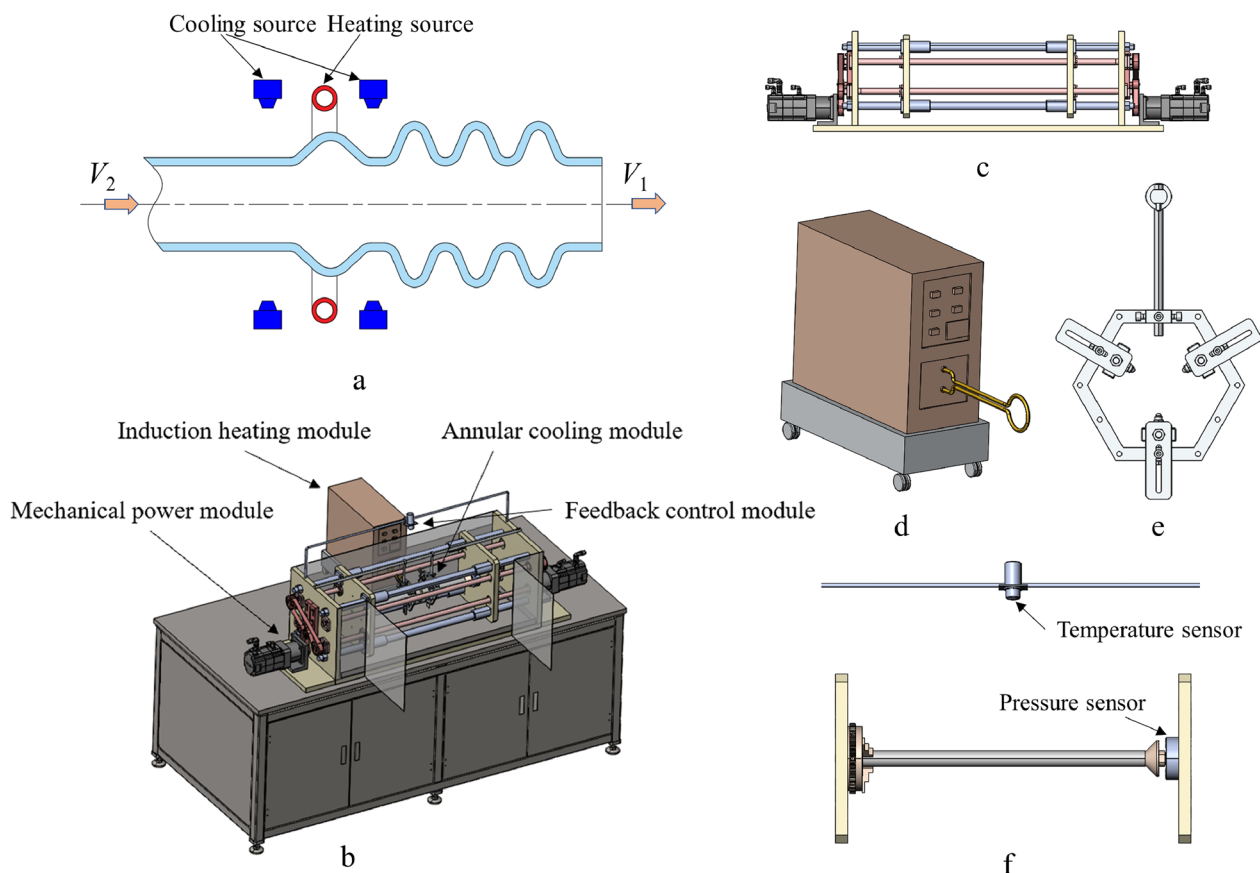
Schematic illustration of the forming apparatus: a Principle drawing, b Assembly drawing, c Mechanical module, d Induction heating module, e Annular cooling module, f Feedback control module
